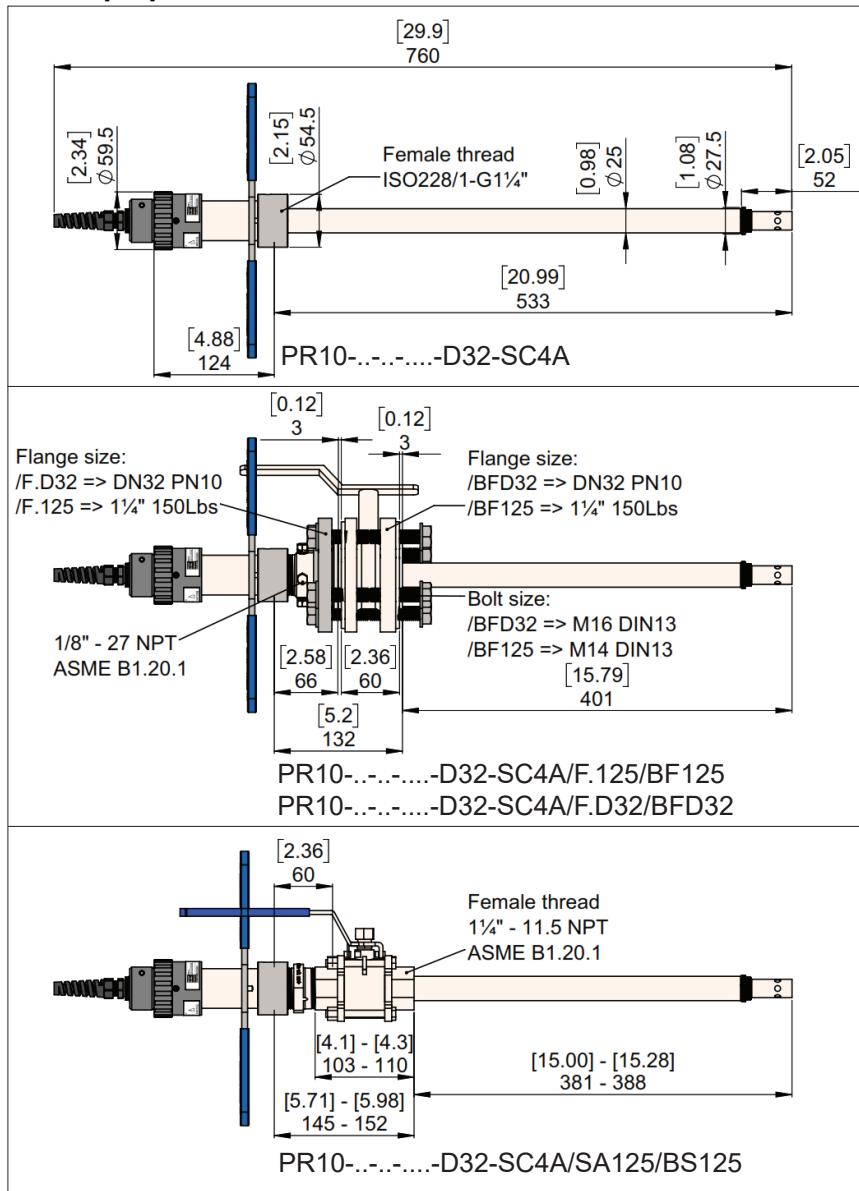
Dimensional drawing PR10...-D32 with mounted pH sensor
